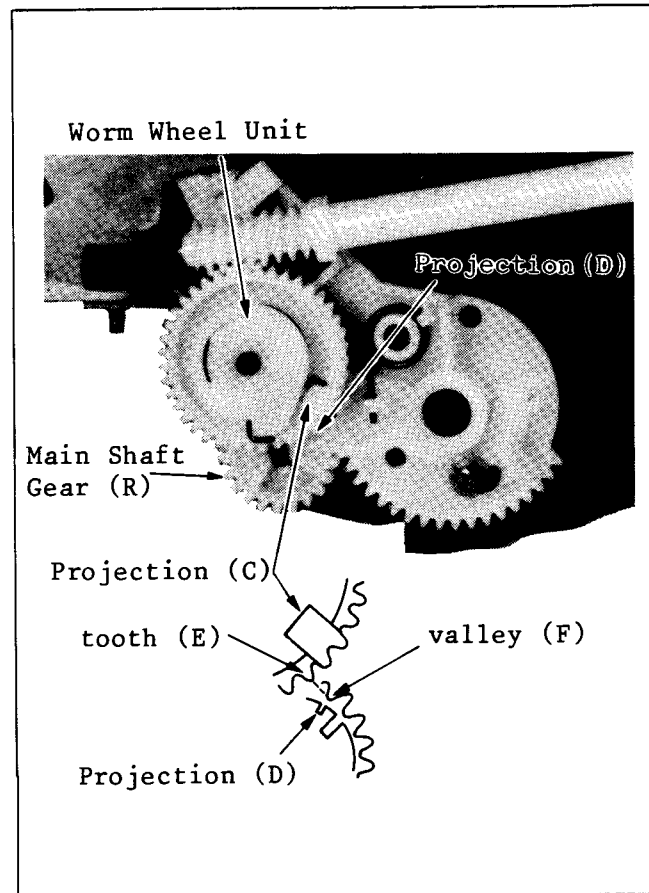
Adjustment of Cassette Up Gears-(4)
